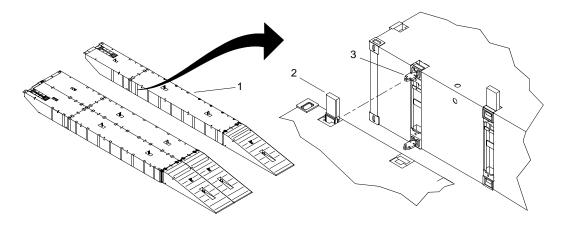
Assembly of Combination Beach/Sea End Section on a Sealift Vessel
